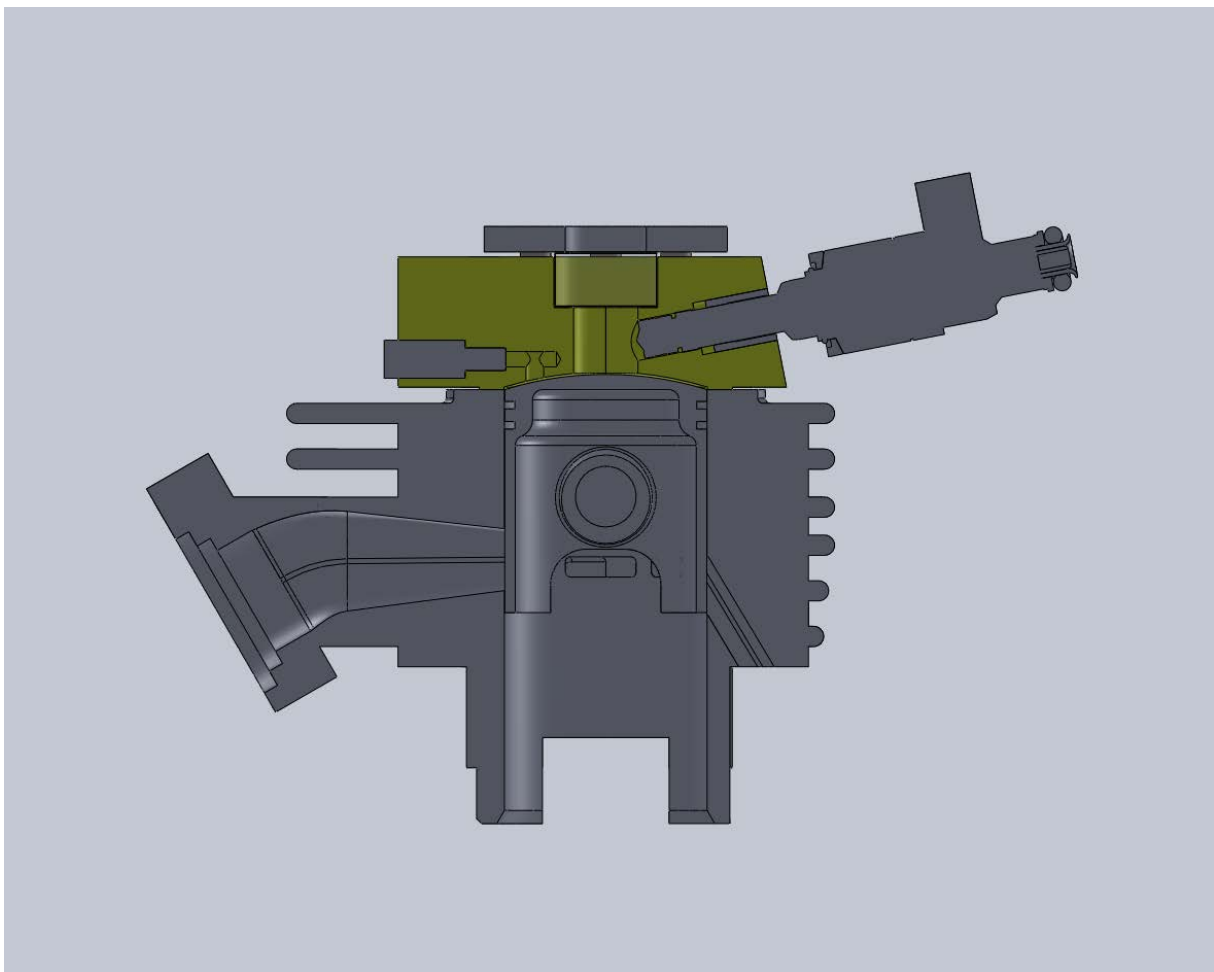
Cut-away showing the optical cylinder head and adjacent parts
